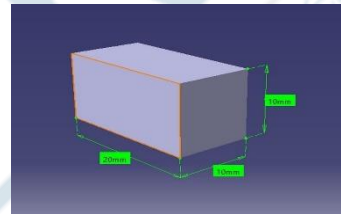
CAD model of the specimens used for measurement of dimensional accuracy
